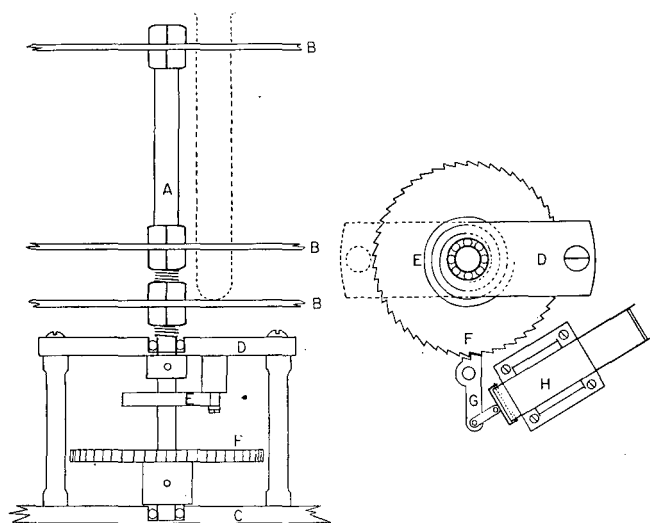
Front and Horizontal Sectional Views of Fraction Collector
